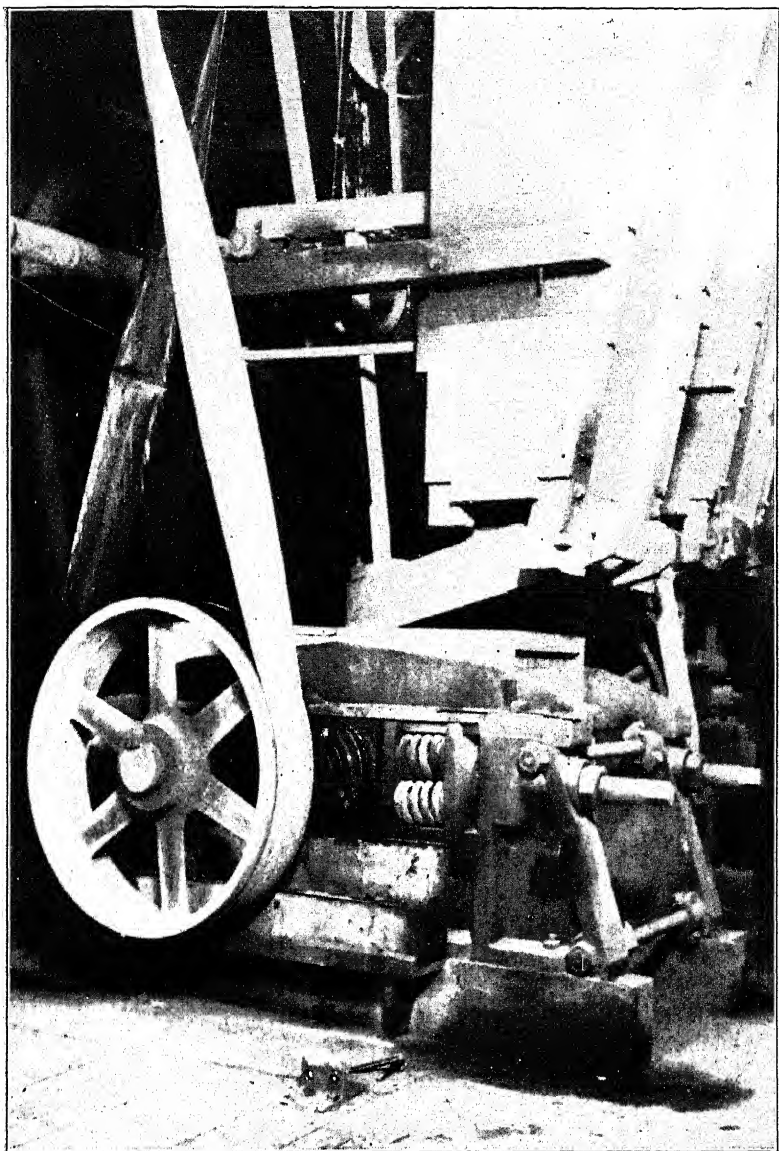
SIDE-VIEW OF 18- BY 12-IN. FRAZEE ROLLS.
